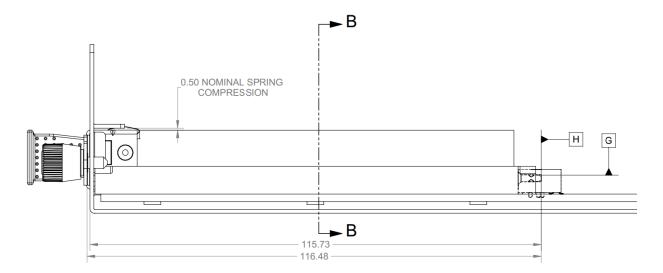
Small Form Factor Baseboard Chassis to Ejector lever Card CTF Dimensions (Side View)
